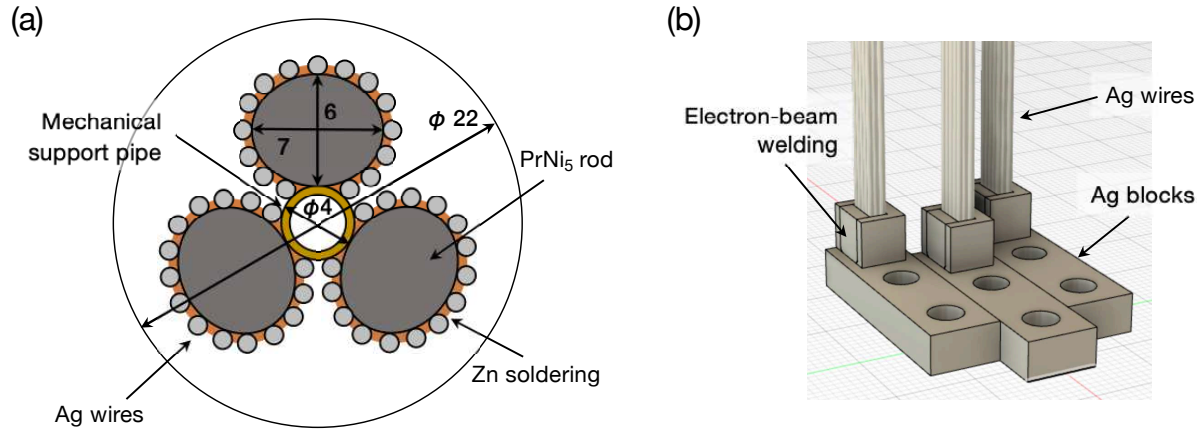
(a) Cross section of the PrNi_5 nuclear stage. The bore diameter of the SSC magnet is 22 mm. (b) Far end of the nuclear stage. The Ag blocks e-beam welded with the Ag wires are attached to the Ag plate with silicon-silver screws.
